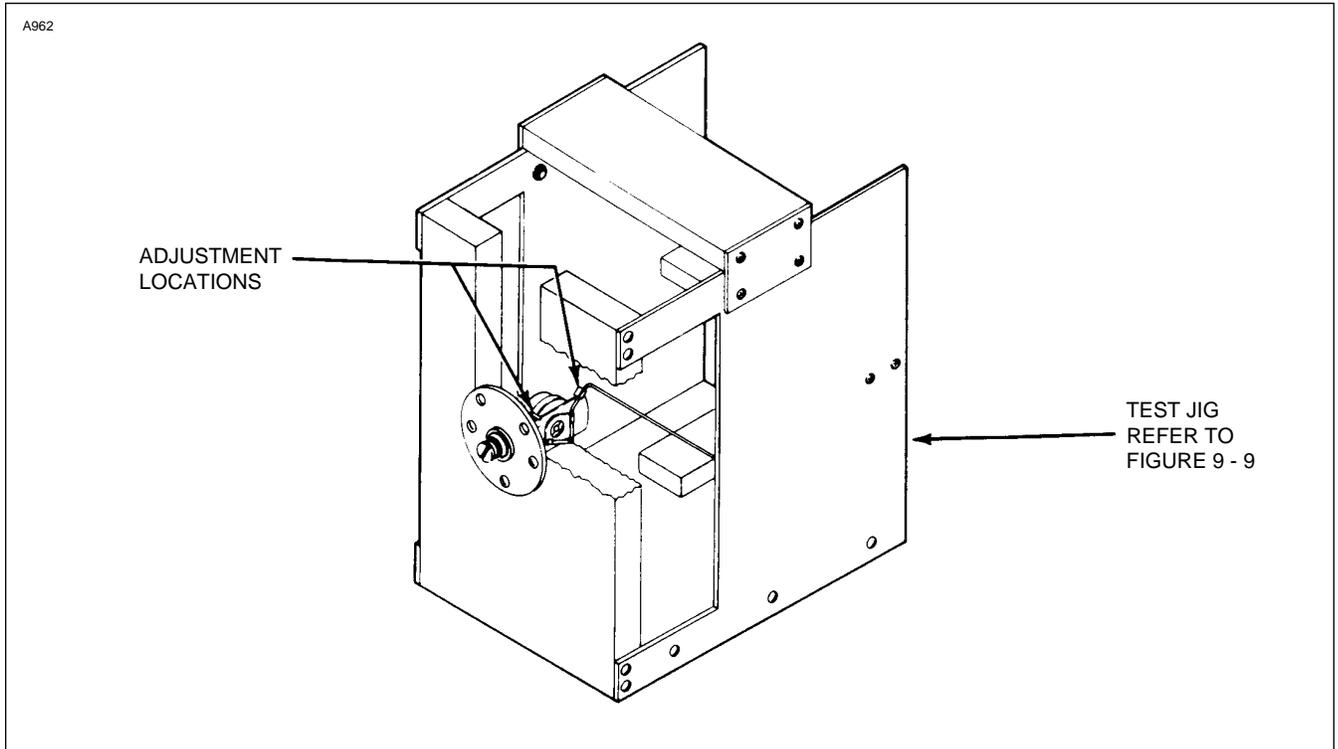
Fuel Quantity Transmitter Checking Jig
